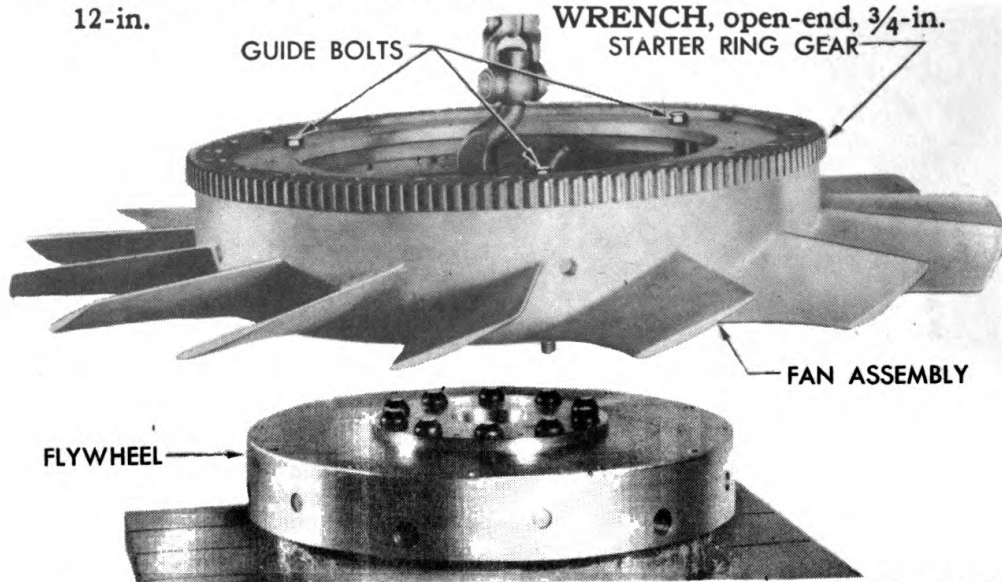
Assembling Fan and Flywheel — Showing Method to Use
